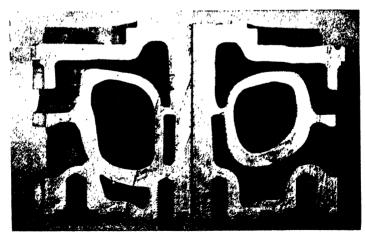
Sectioned Cylinder Head Removed after 250,000 Miles in Freight Service. Water Passages Completely Free from Scale or Corrosion.
